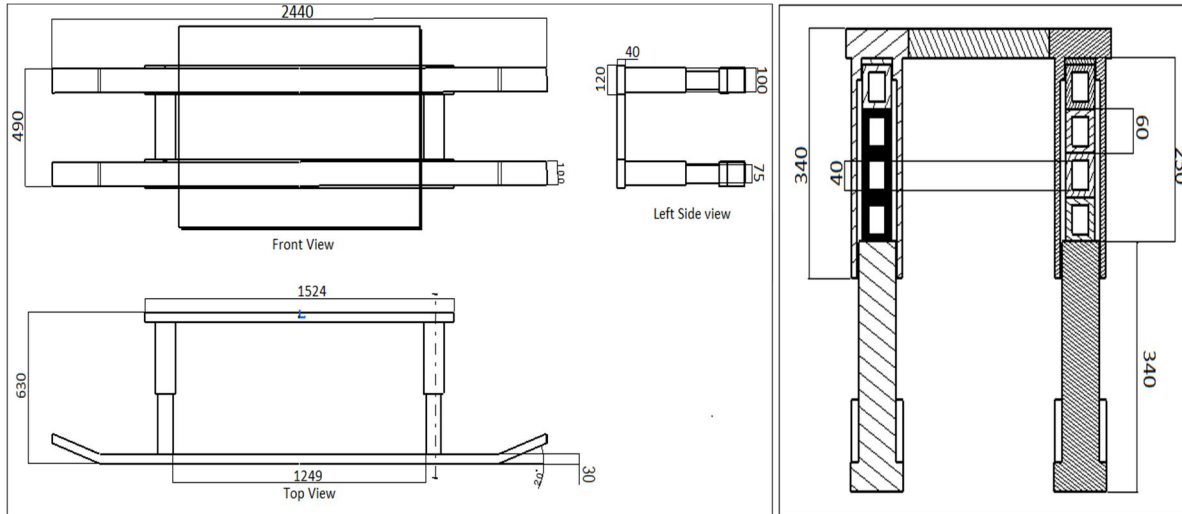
Detailing of assembly of safety impact guard designed for sustaining 80% of loading
